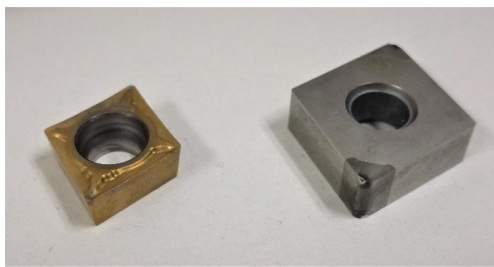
Picture of the carbide tool (left) and PCBN tool (right).
